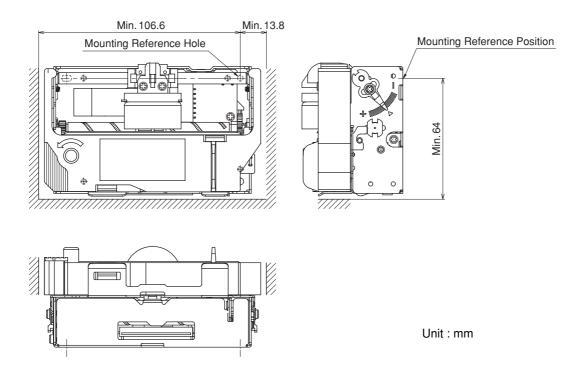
Space for Mounting Removing the Ribbon Cassette
